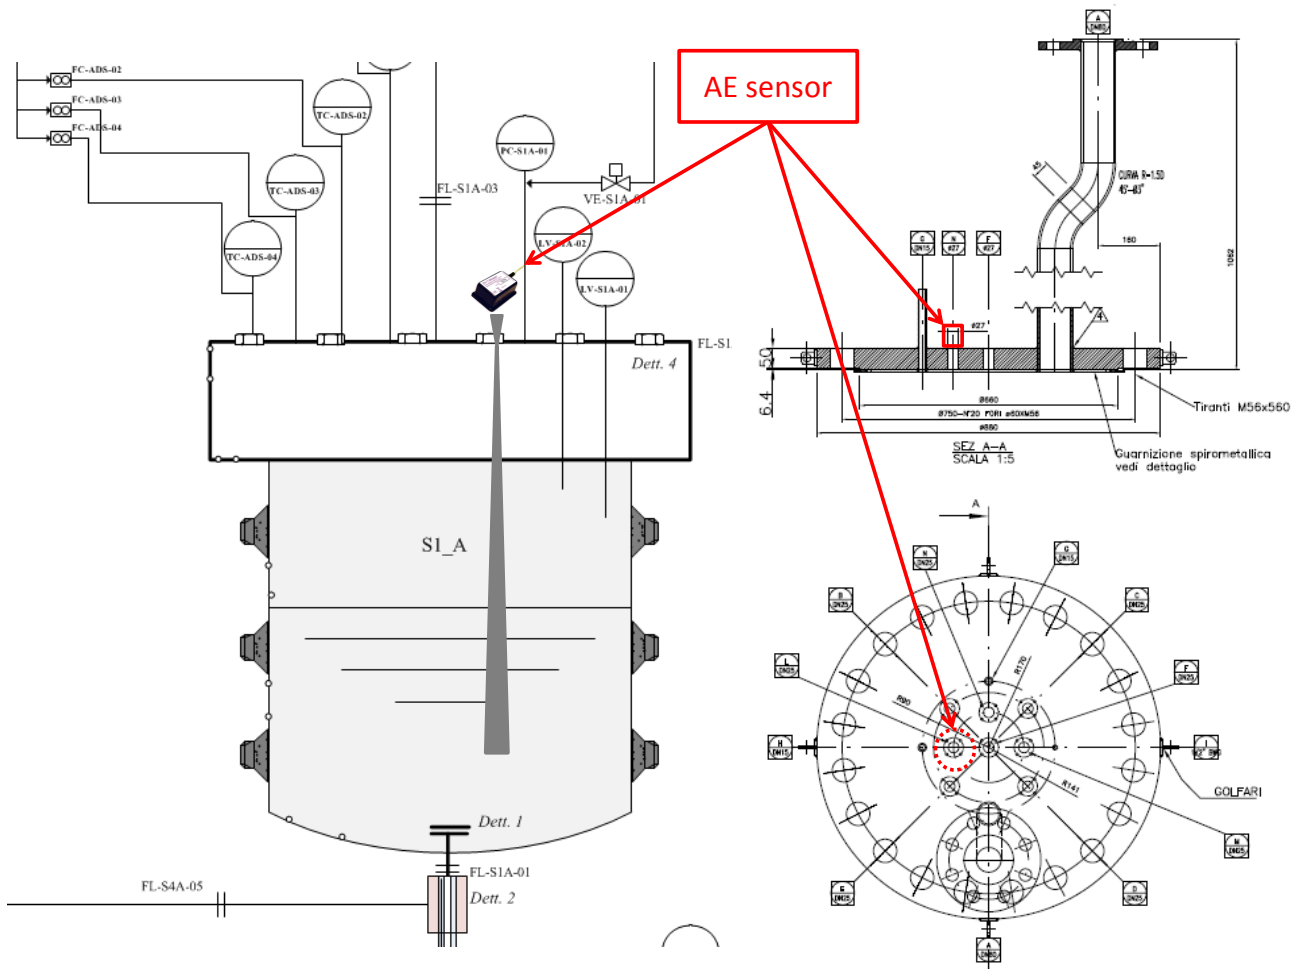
Penetrations of S1\_A top flange and installation inside the vessel.
